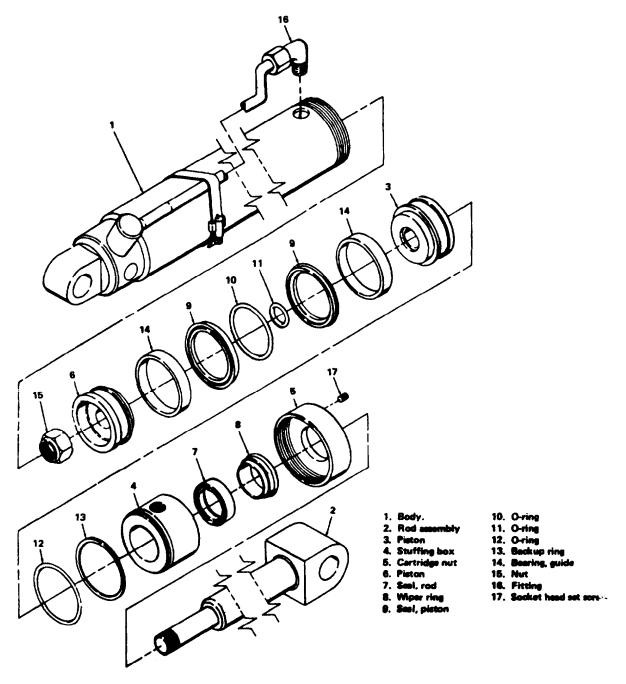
Outrigger Extension Cylinder (38489 & 38491)
